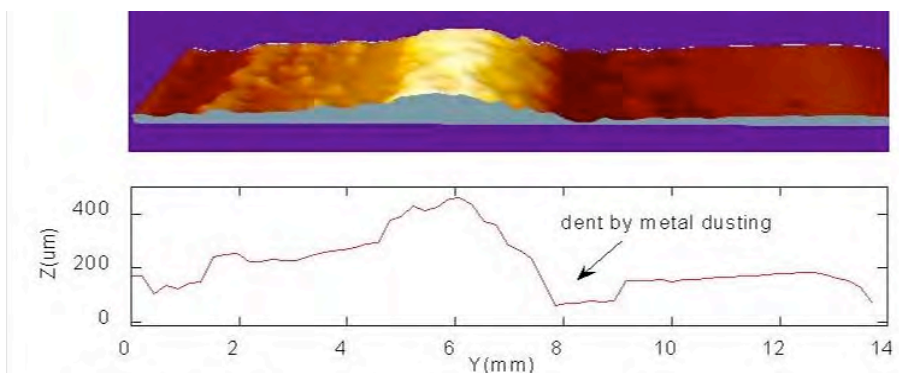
3D-profile map of W3 weldment. Metal dusting pits had coalesced into a belt in the boundary between the weld and base alloy.
